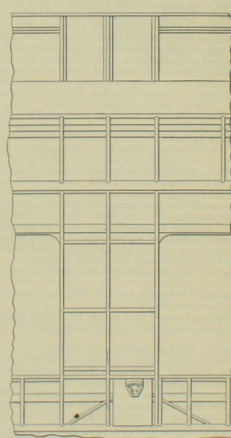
Window Panel Framing, and Truss Over Bolster
